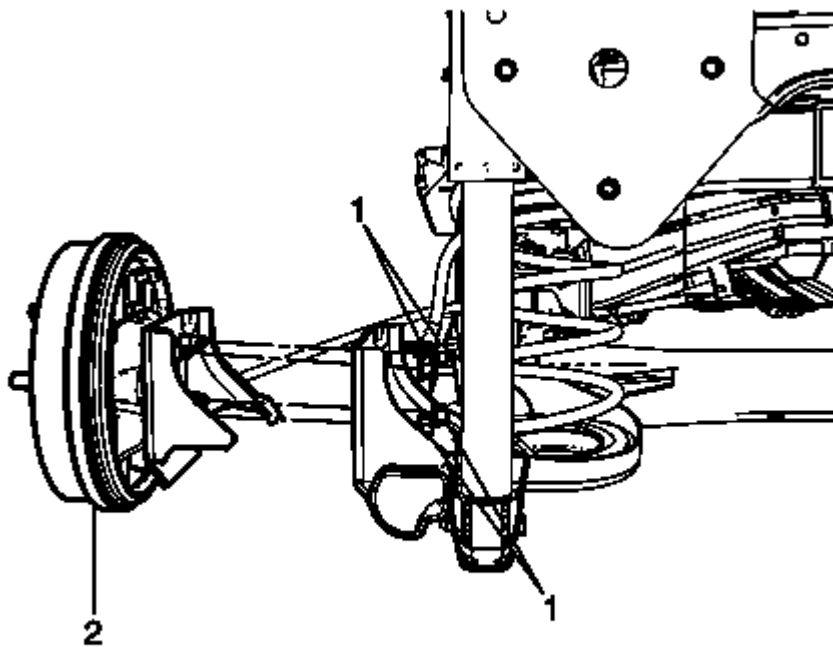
Rear Axle Retaining Nuts And Backing Plates As An Assembly
